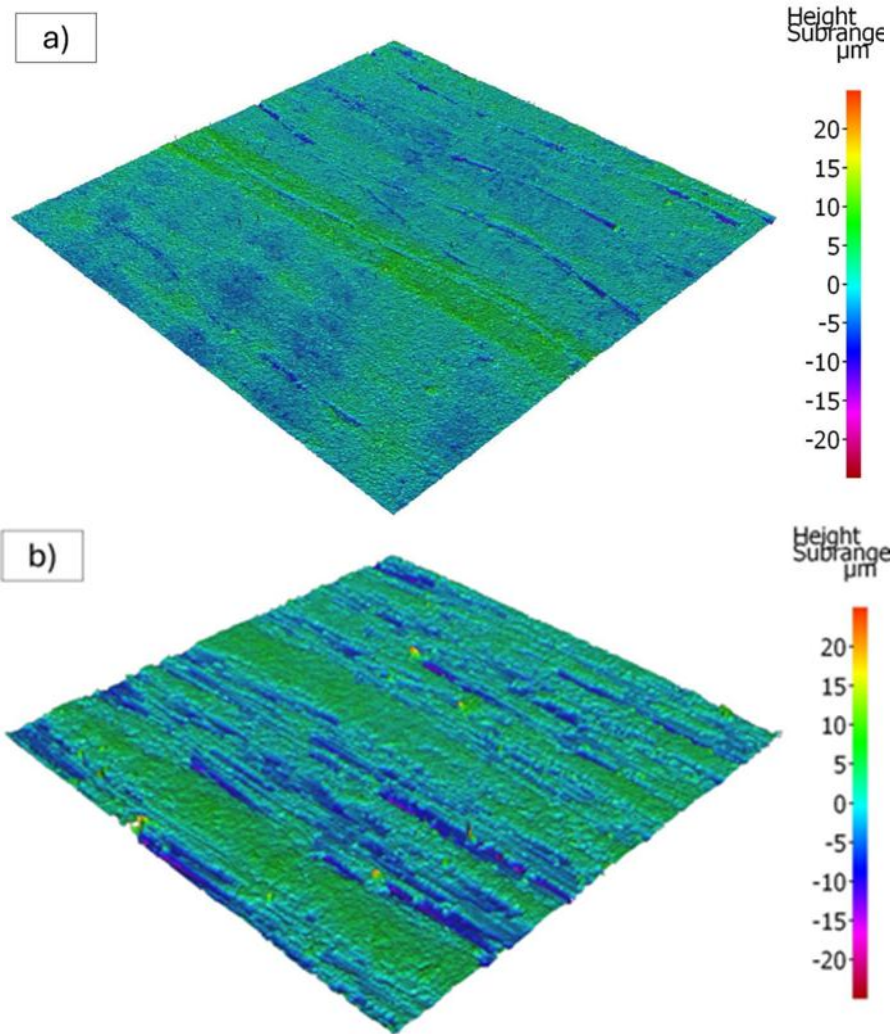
Machined surface topography of the CFRP after milling 3000 mm in wet cutting condition with a cutting speed of (a) 100 m/min (b) 50 m/min.
